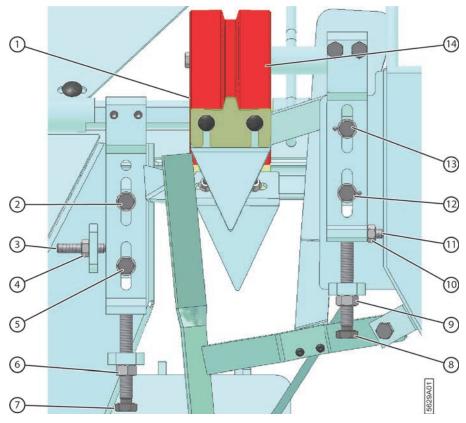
Adjusting the tension of the lowermost outermost picking belt
